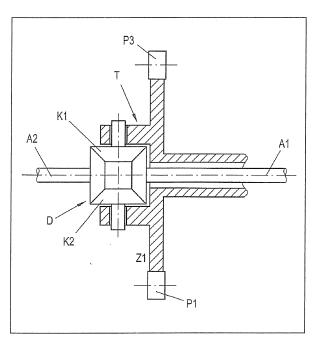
Planetary motor with differential gear box D (housing T, bevel wheels K1, K2), functionally combined with sun wheel Z1. Planets P1, P3 (shown without connected rotors of the electrical part). Semi-axes A1, A2, connected to the drive wheels.
